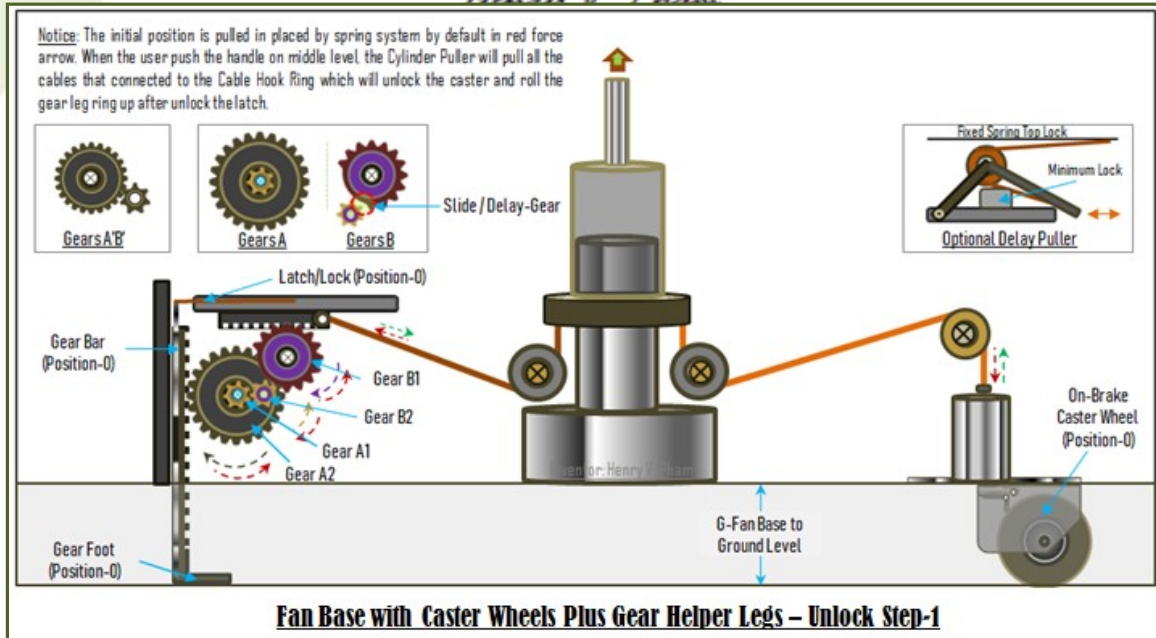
360° Stand G-Rotator Fan – Caster Wheels & Gear Helper Legs Lock/Unlock Step-1
